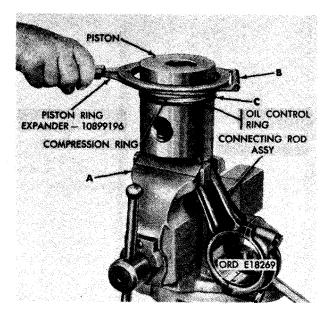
REMOVING OR INSTALLING PISTON RINGS USING PISTON RING EXPANDER - 10899196.
